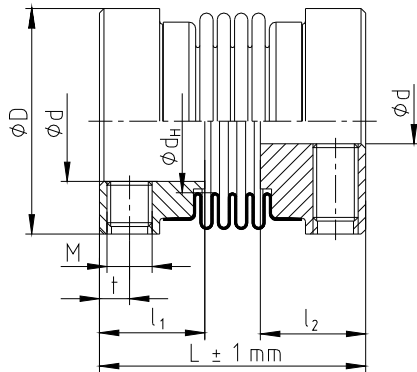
TOOLFLEX® type S with thread for setscrew (type 1.1)
